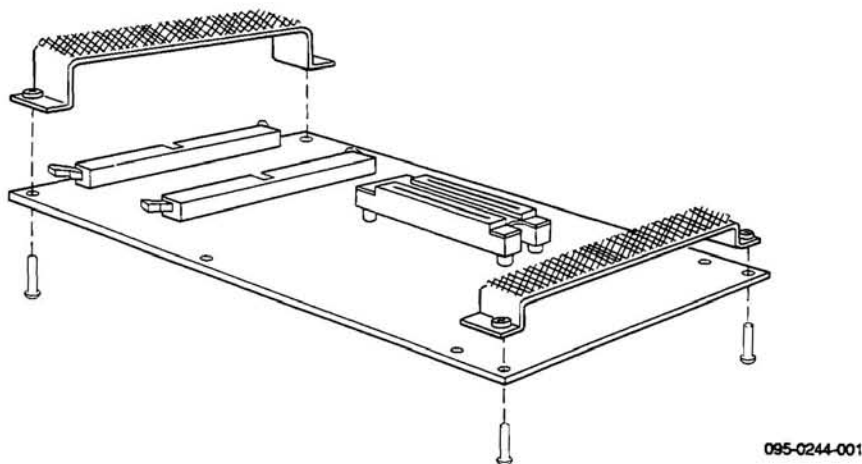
Installing the Velcro Mounting Brackets on the Performance Board
